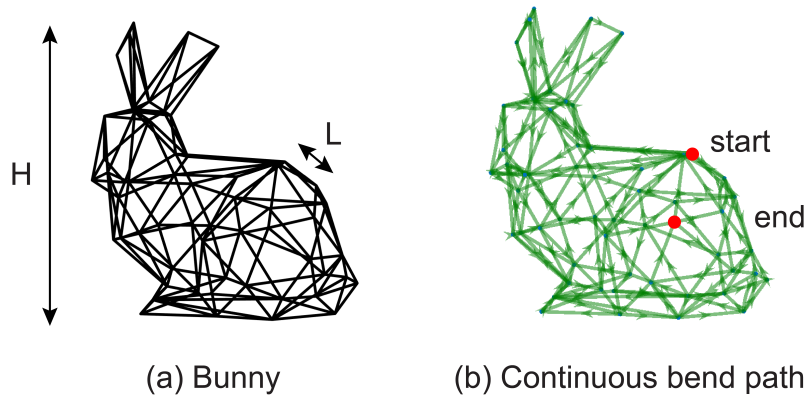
Geometry and bend path for a bunny fabricated with Bend-Forming. A 3D bend path is computed for the truss and converted to machine instructions for fabrication.
